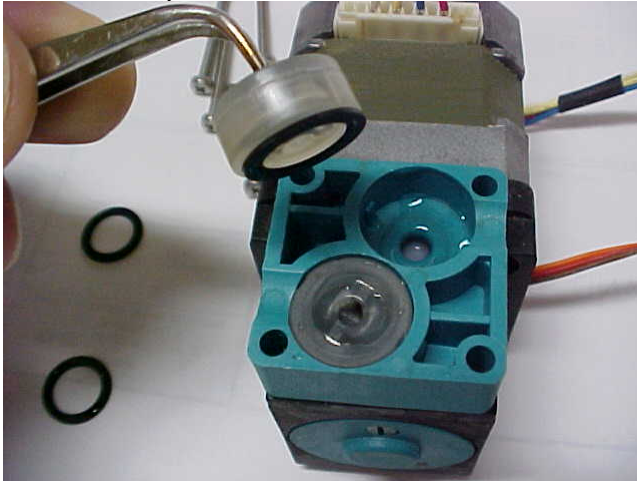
REMOVING VALVE CARTRIDGE. SEALING RING STUCK TO OLD CARTRIDGE.
